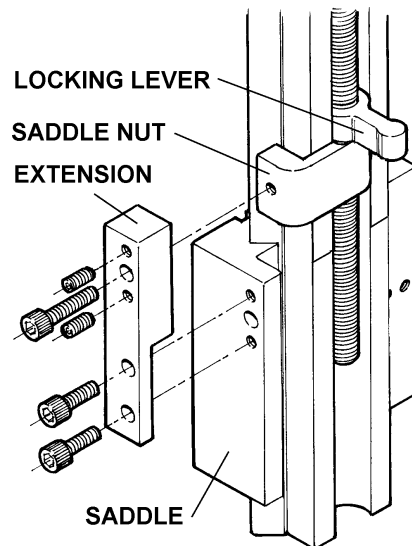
Remove the two set screws from the saddle and reinstall them in the extension. Then attach the extension to the saddle and saddle nut with socket head cap screws as shown.
